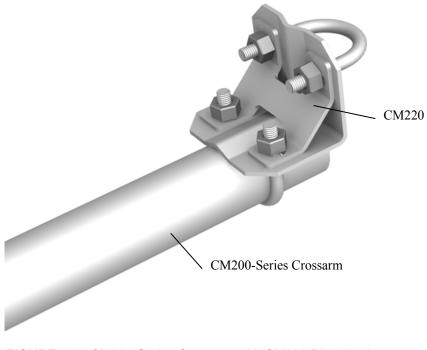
CM200-Series Crossarm with CM220 Right Angle Mounting Bracket
